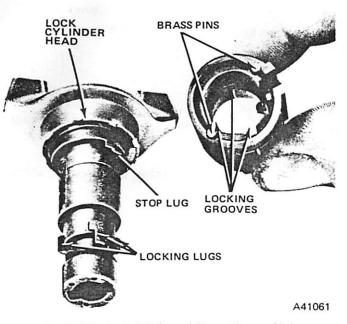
J-66 Lock Cylinder and Sleeve Disassembled
